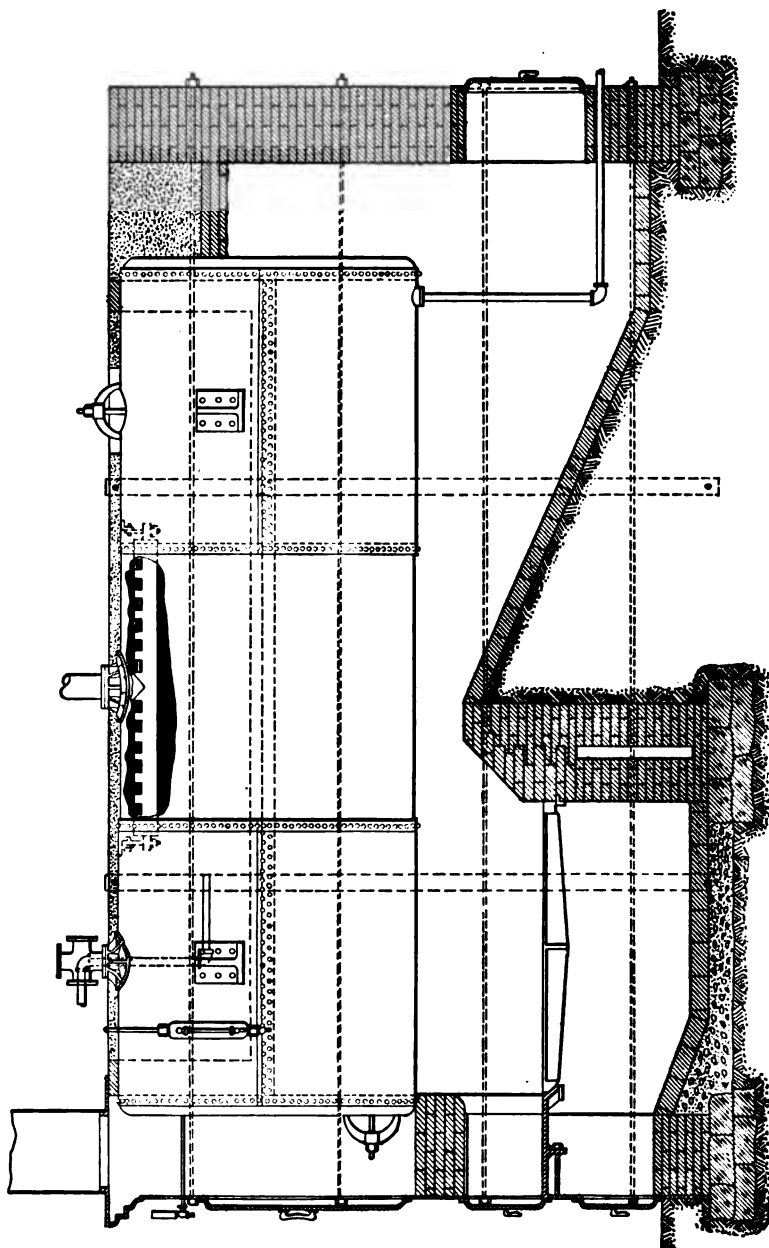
Horizontal Return-tubular Boiler, with flush or full front.
